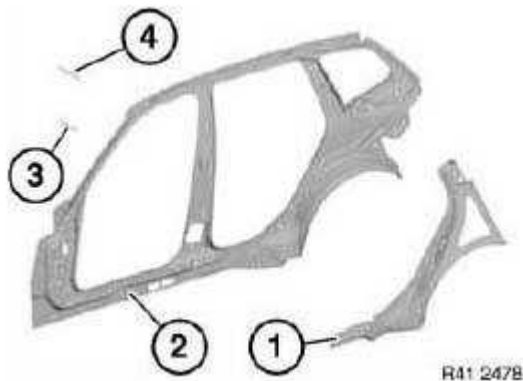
C-Pillar Reinforcement, Inner Side Frame And Rear Outer Entrance Shaped Part
